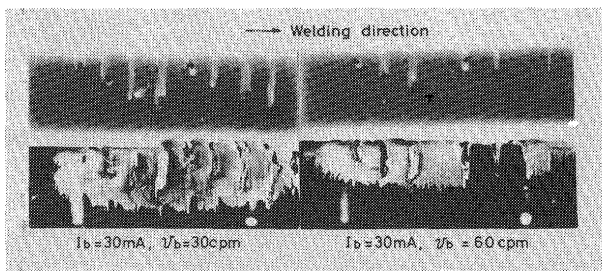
Radiograph and macrostructure in SUS304 welds. (Used silver brazing filler metal for insert metal)
